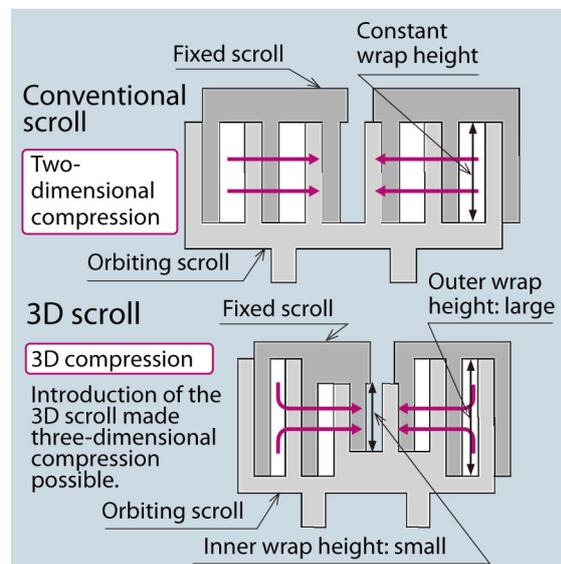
Cross-sectional view of conventional and the 3D scrolls
